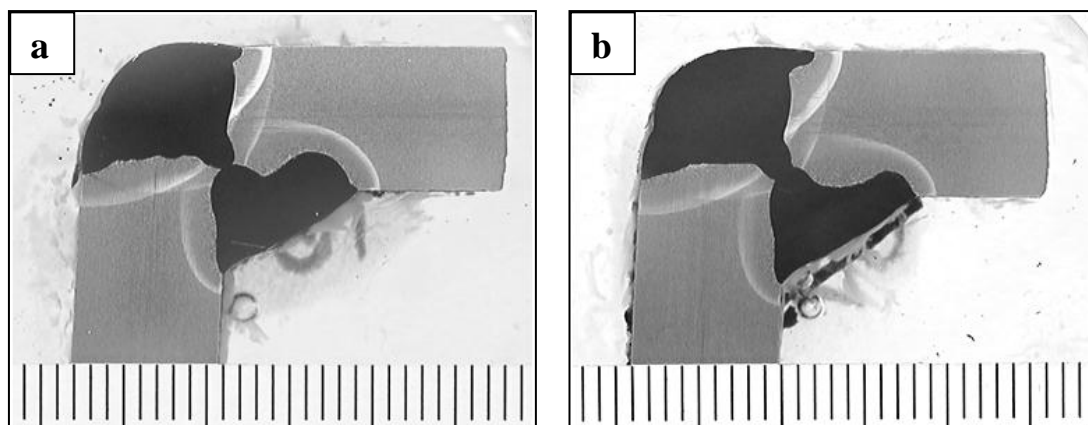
Macrophotographs of the 4 pass corner welds deposited with metal-cored consumable; a – “current weld” and b – proposed “optimised weld”. Note: scale is in millimetres.
